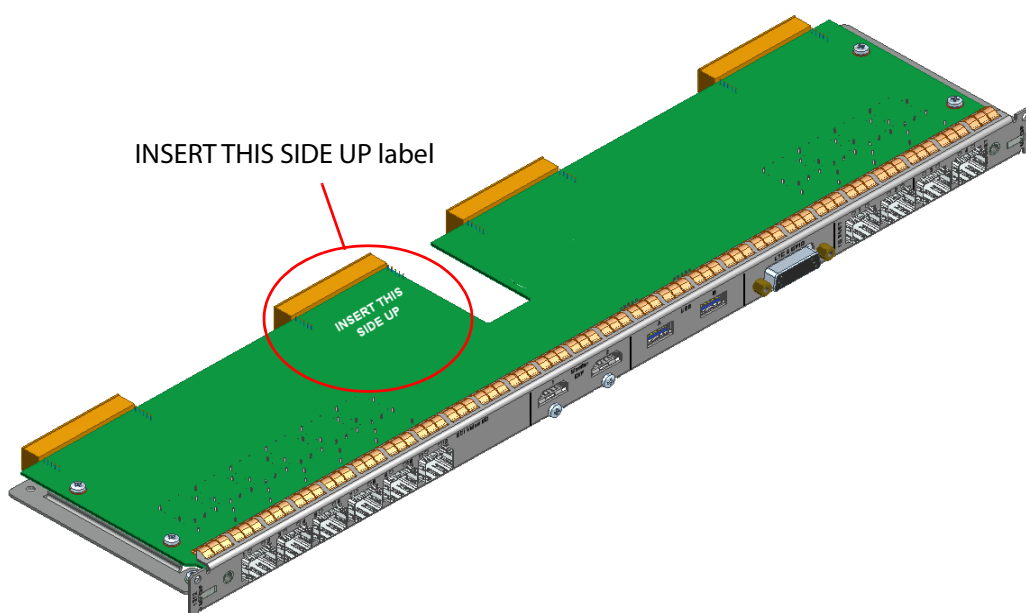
1312 Rear panel module, showing "INSERT THIS SIDE UP" label.
